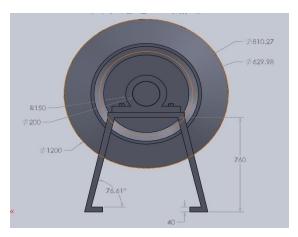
, Shaft, Impeller and Cushion Assembly (front view)
